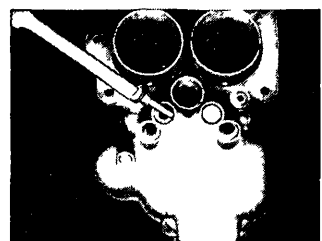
Install two new low speed jets. Be sure to install small copper washers (where used) before installing jets
